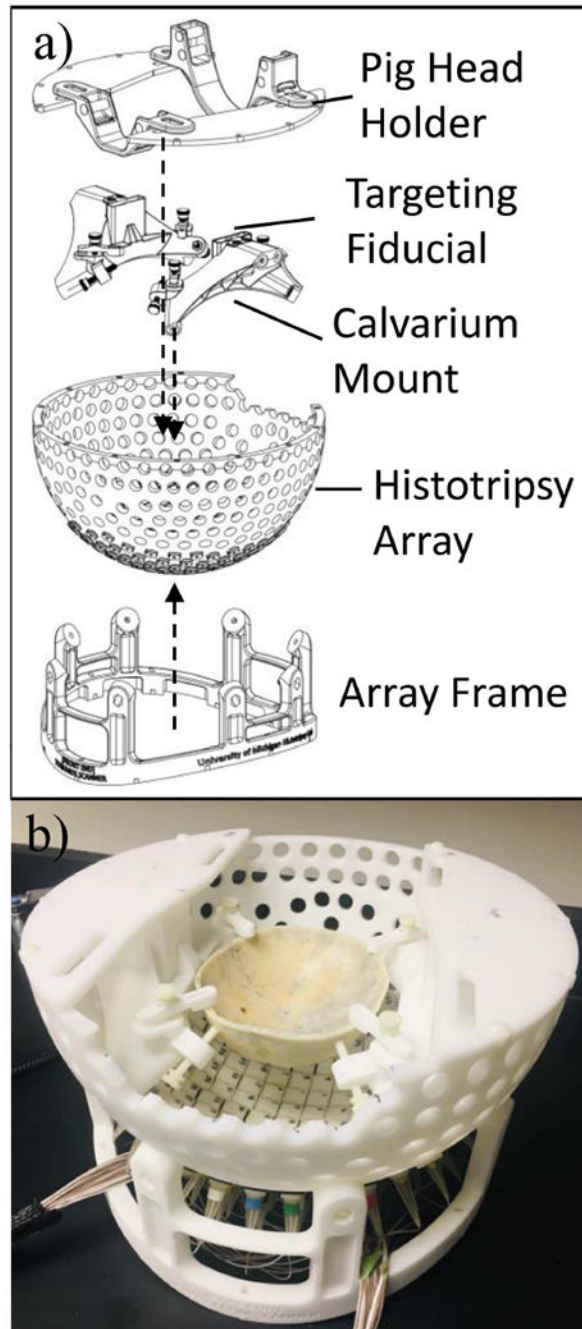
Exploded view (a) and photo (b) of the tcMRgHt array and accessories.
